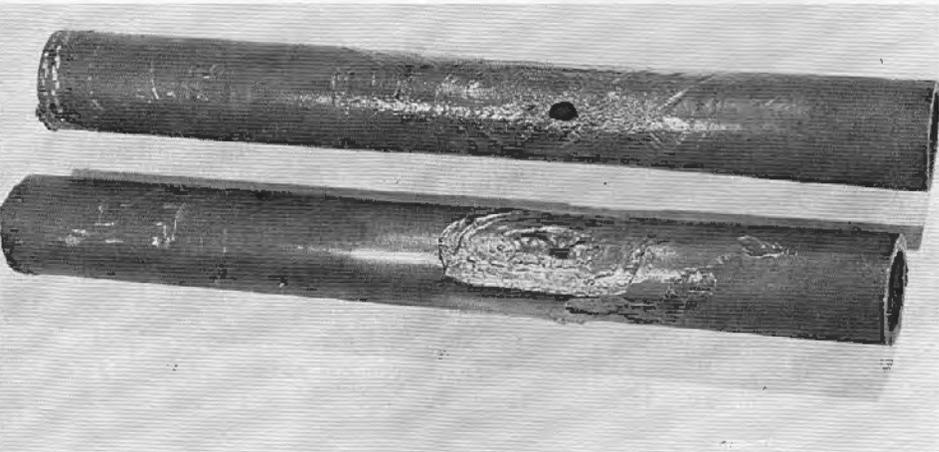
Fuel oil heater drain cooler tube damage.
